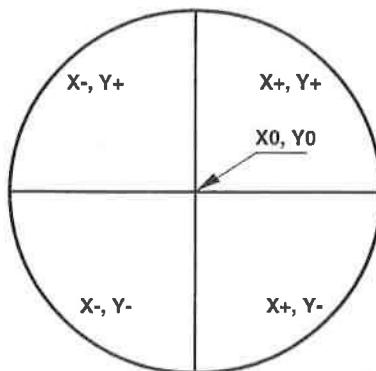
All four quadrants will have to be accessed to machine this part.
